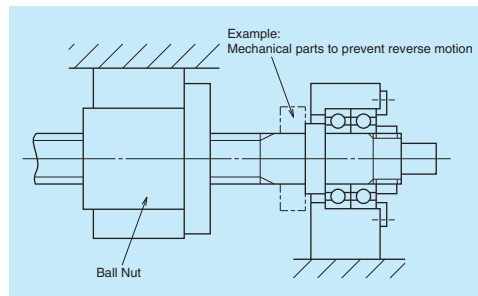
Nut and ball screw are required to be separated when installing in this structure.
